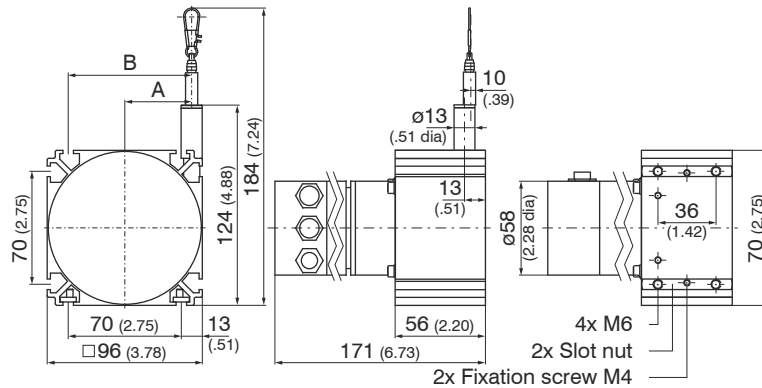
Dimensional drawing ... - FD96 - CO/PB, dimensions in mm (inches), not to scale
